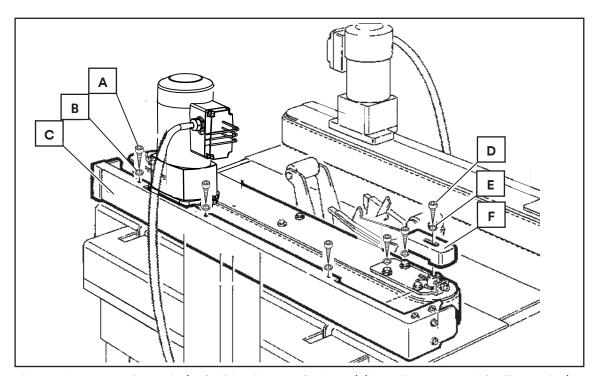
Box Drive Belt (Left Side View - Infeed End) (Guarding removed for illustration)
